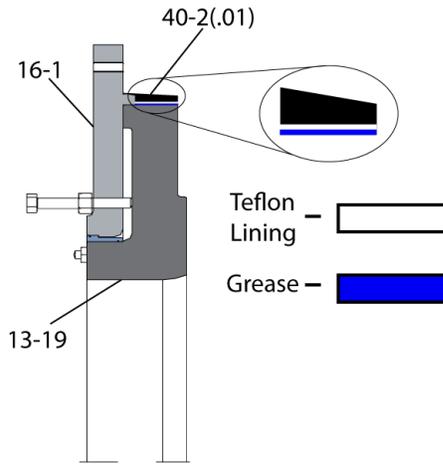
Snap-Ring Gasket Installed Over Liner
